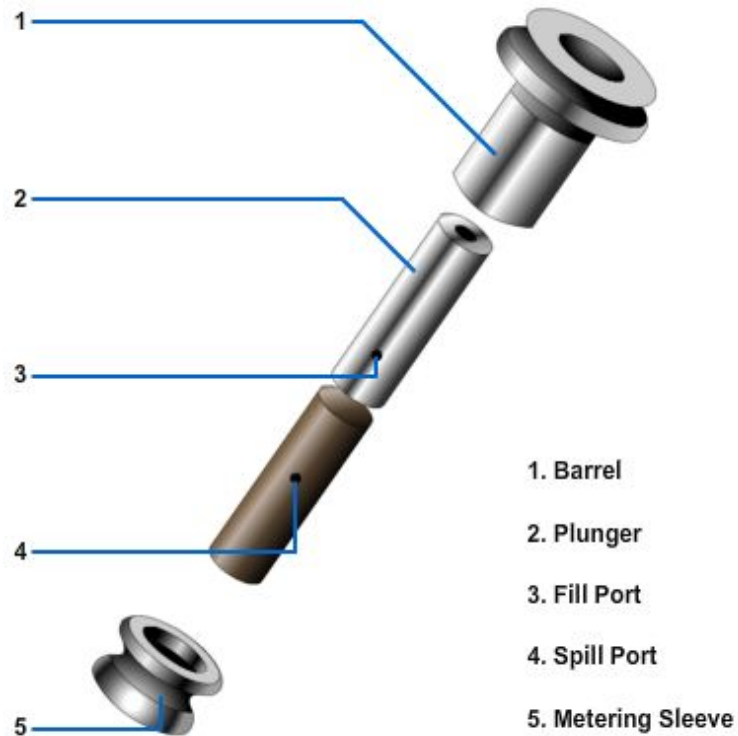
Sleeve metering barrel and plunger assembly.
